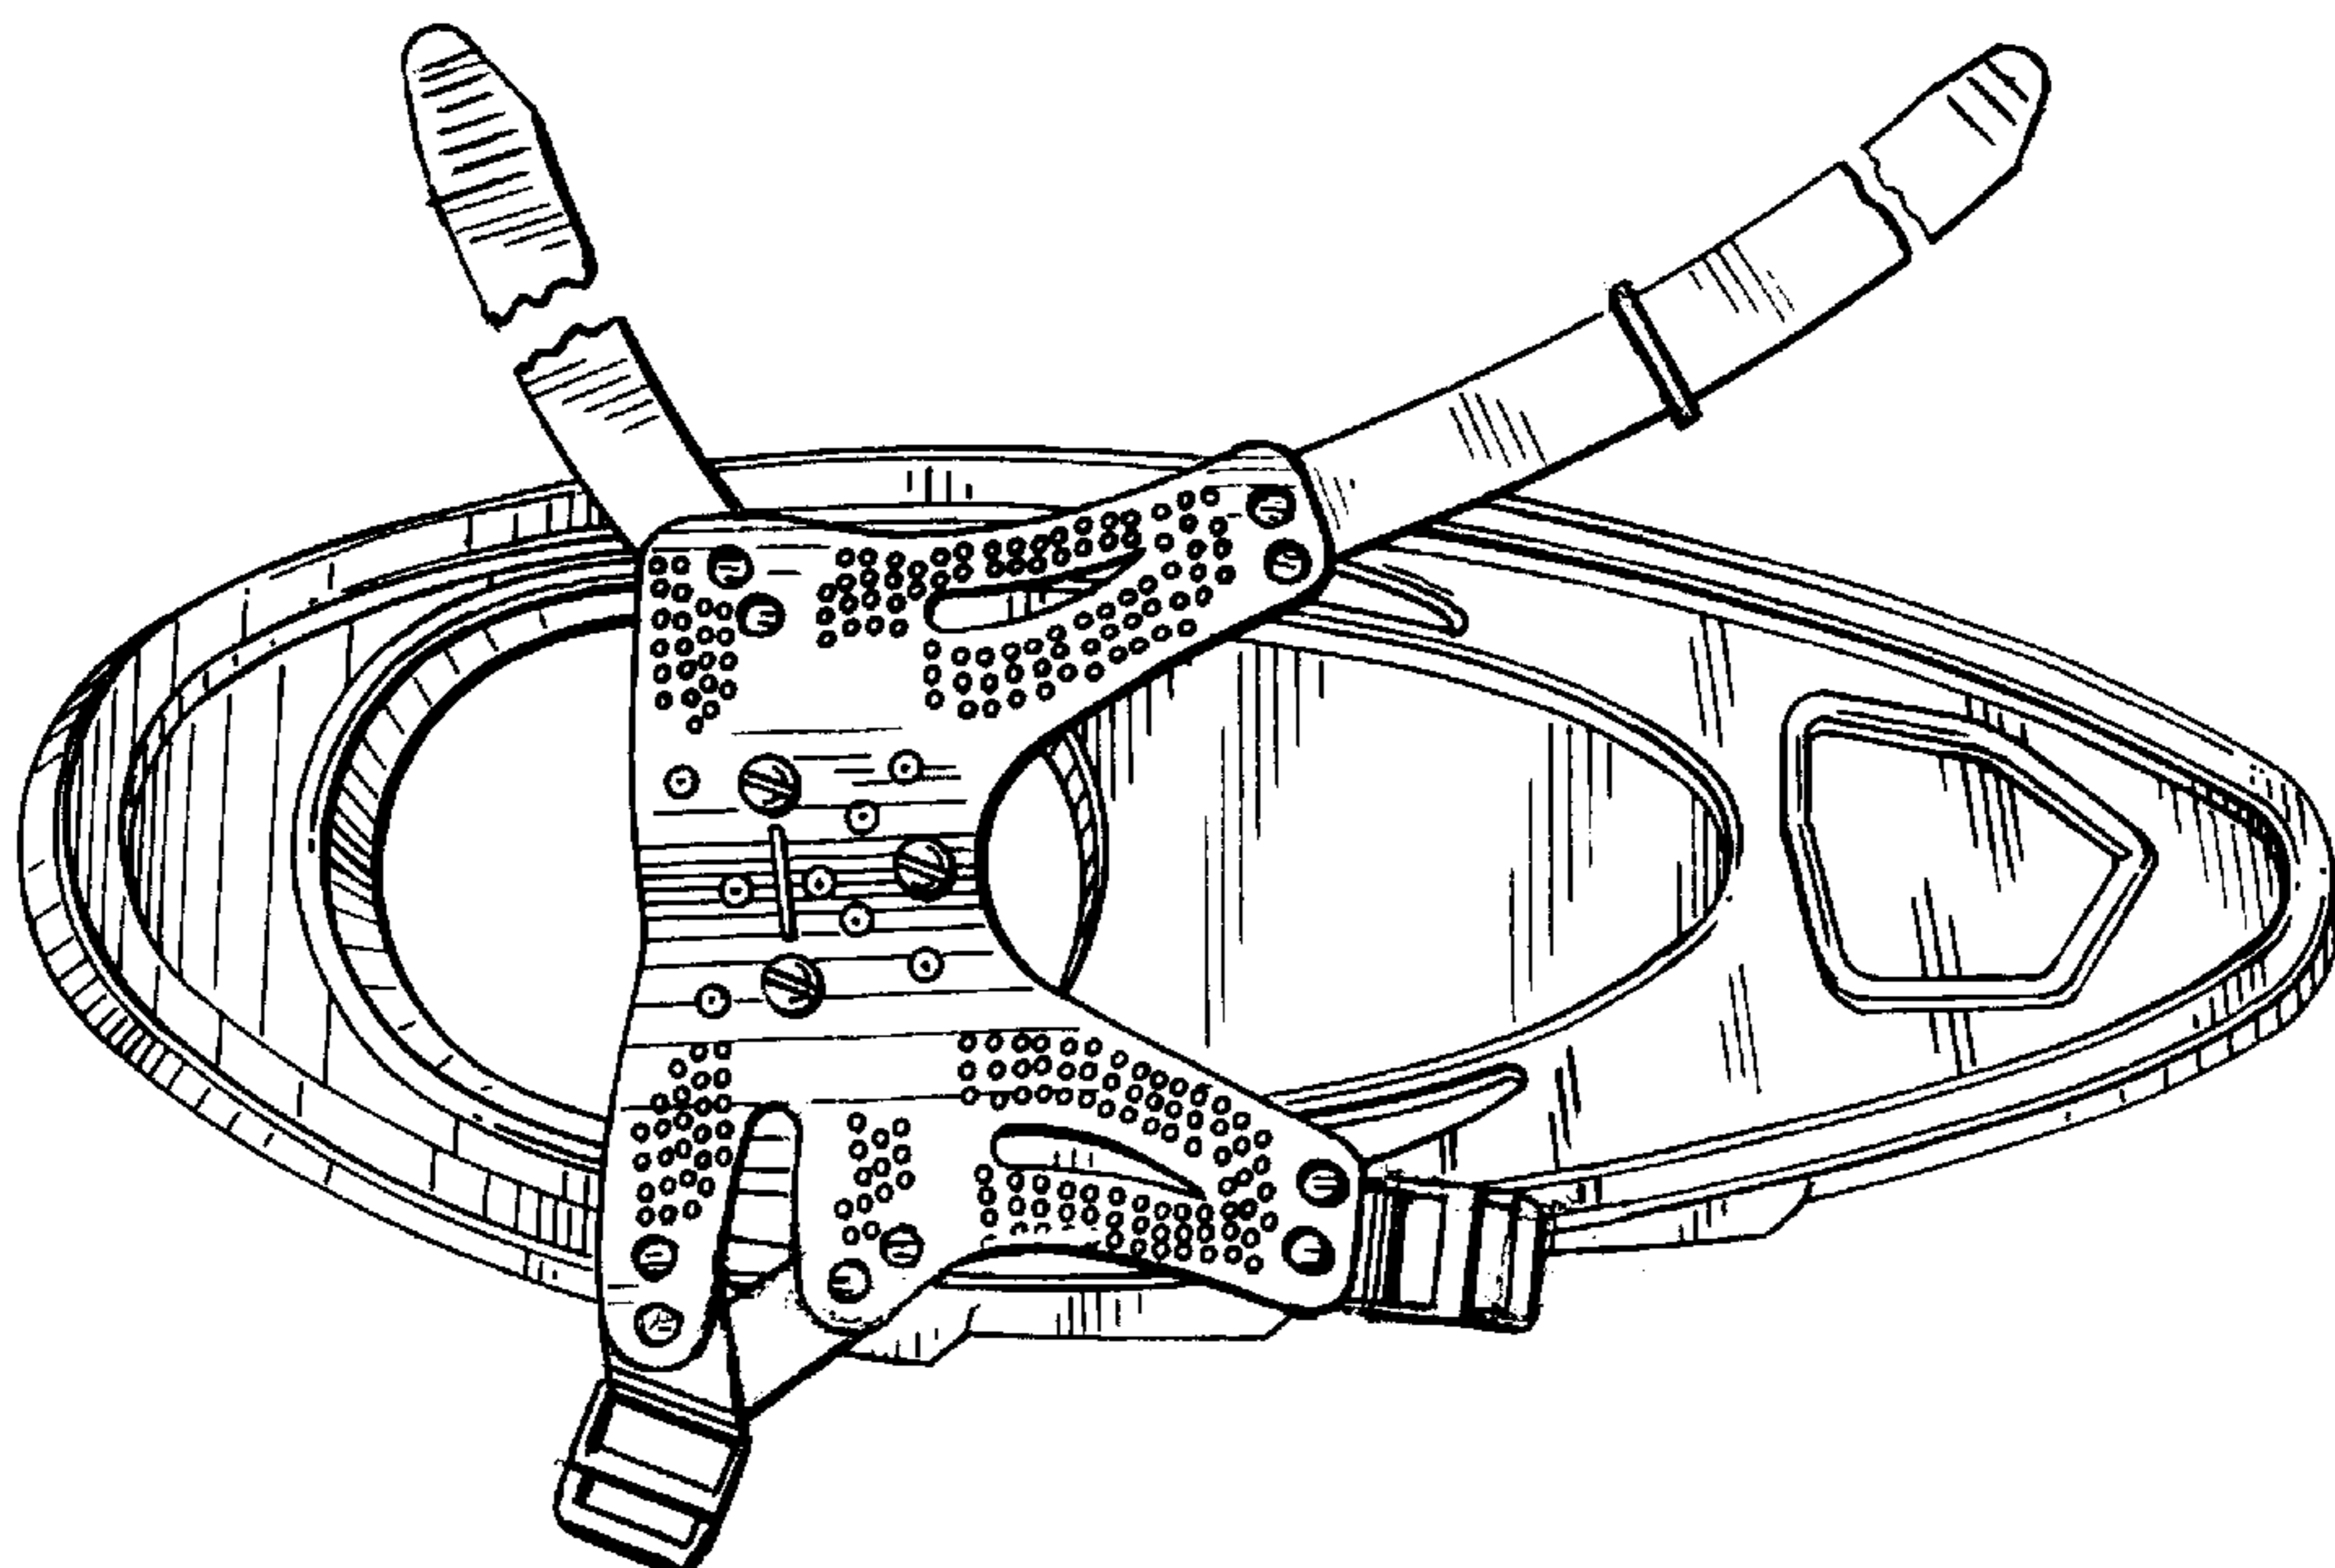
is a bottom perspective view of the crampon of the molded snowshoe of the invention;
